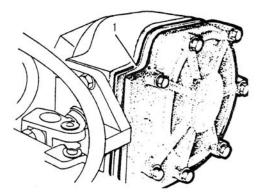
Adjustment of the total clearances between the left and the right brake strips 1- Adjusting Spacers
